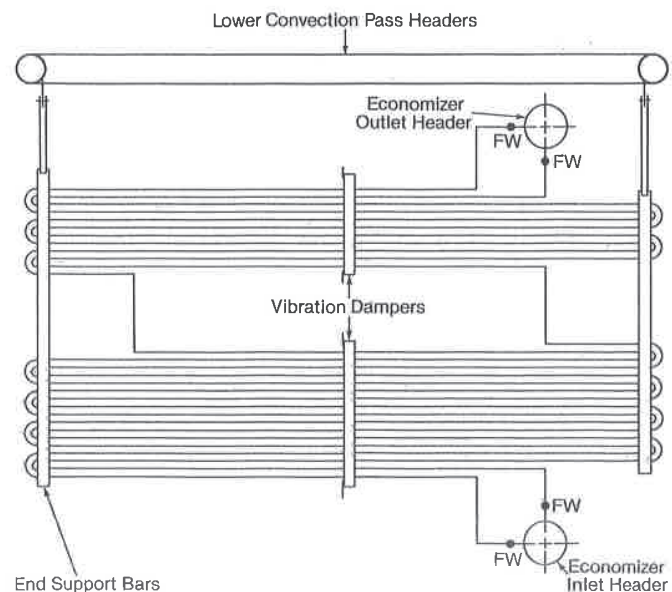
Economizer supports — sample lower waterwall header arrangement. (FW = field weld.)
